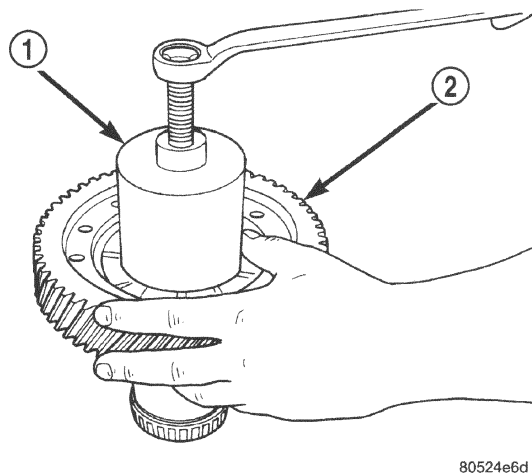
Remove Differential Bearing Cone (Ring Gear Side)
